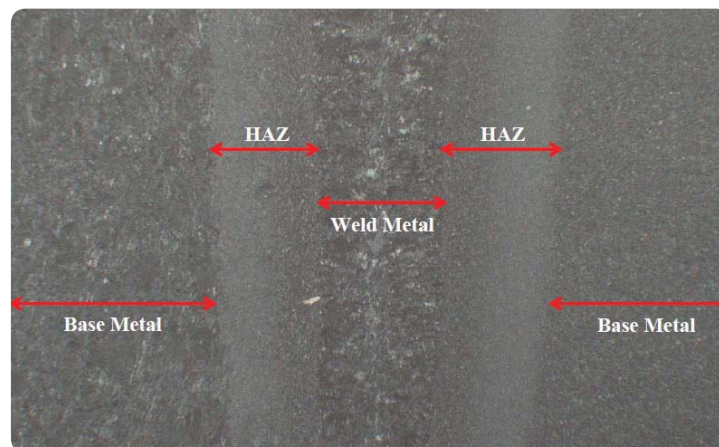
Microscopic image of a seamed pipe welded joint specimen representing different weld zones
